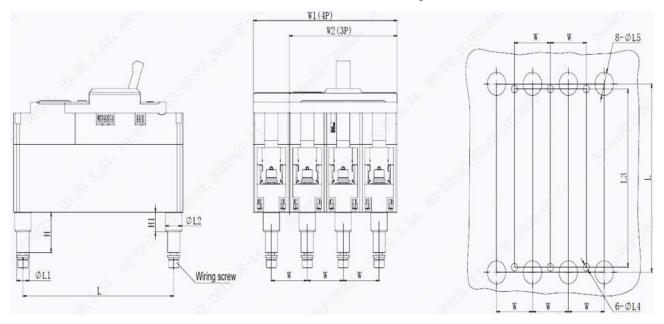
3P, 4P outline dimension drawing of rear wiring board
